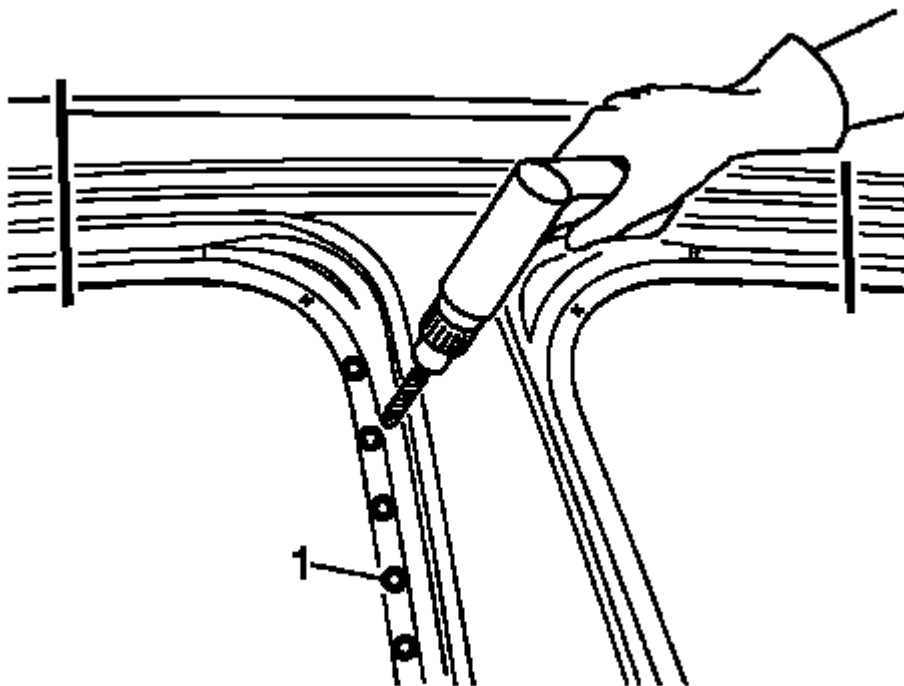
Locating And Drill Out All Factory Welds
